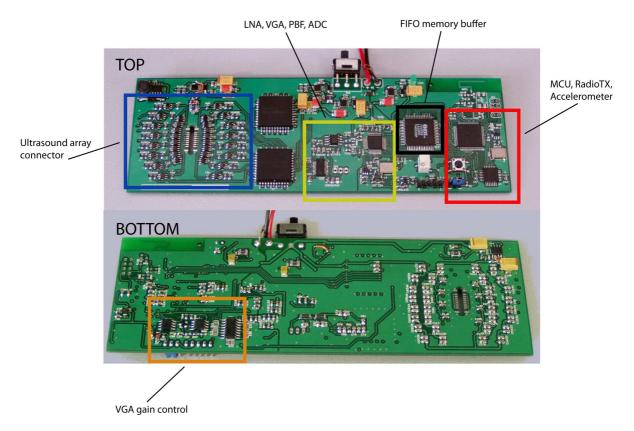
Troy pill rev.1 PCB prototype assembled, with functional blocks explained.
